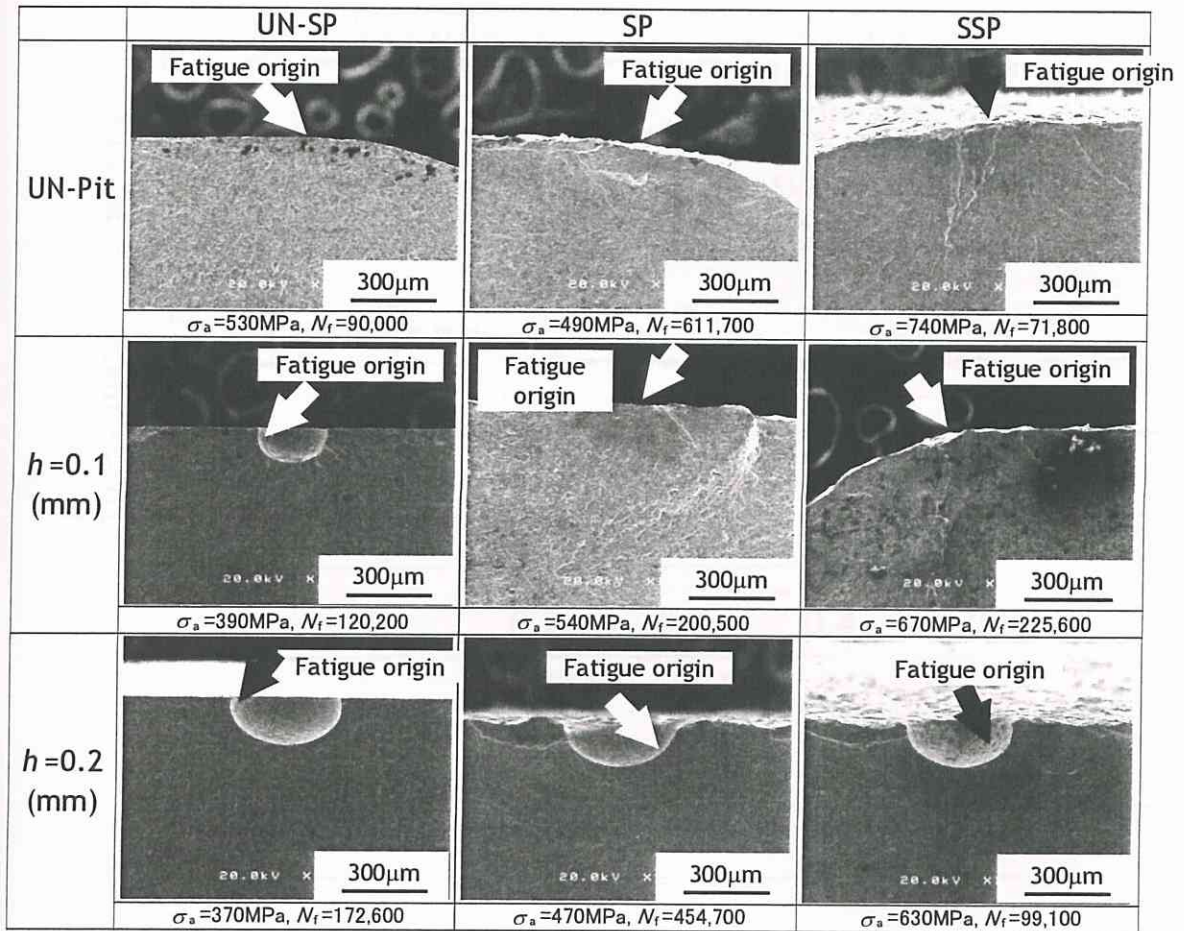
SEM image of fracture surface after fatigue testing.
